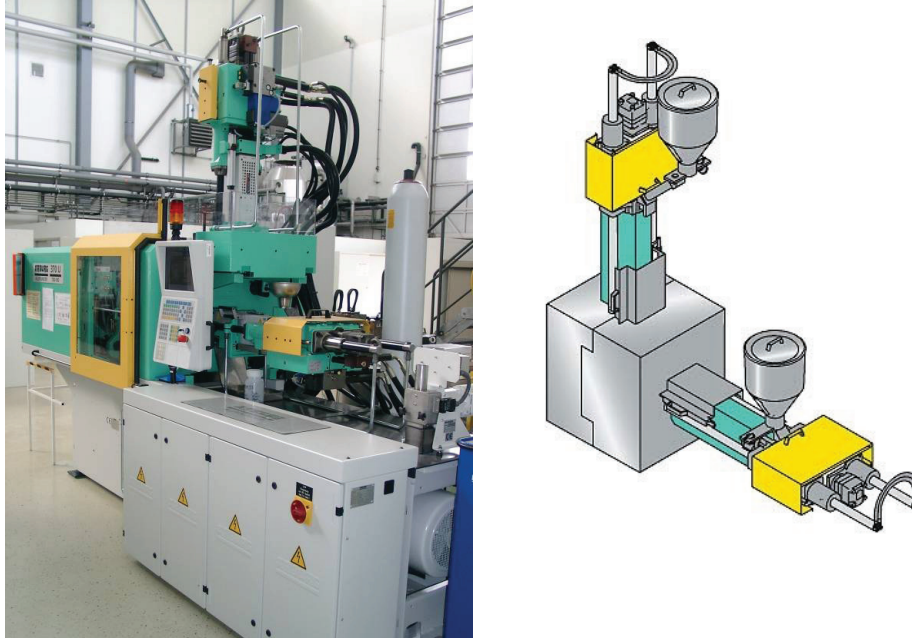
Left: picture of the 2-component MIM-machine used. Right: schematic drawing of the injection units [118].
